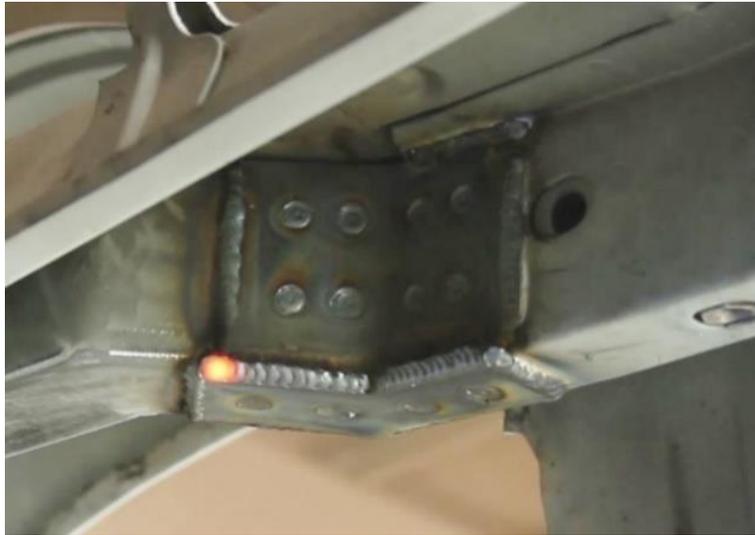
Weld Bottom Frame Rail Doubler Plate
